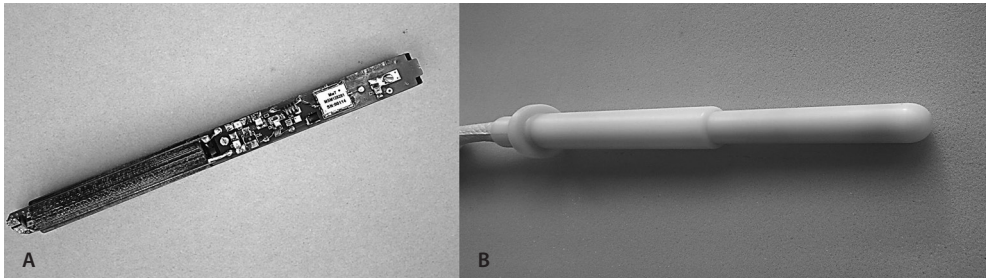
The current rigid endoluminal coil on 3T. A) PCB assembly, B) Complete with housing.
